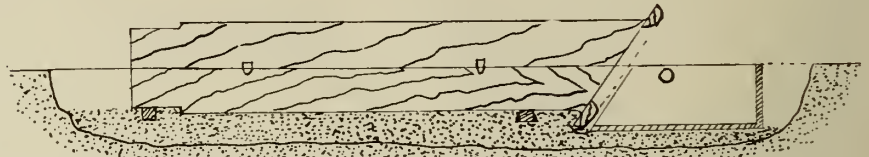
SHOWS PATTERN DRAW-BACK BEDDED IN.
